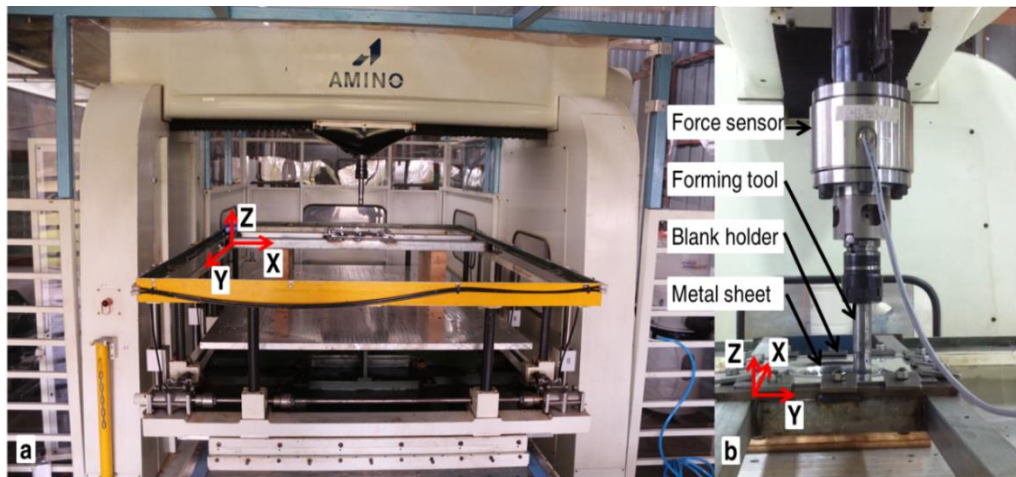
The AMINO incremental forming machine and the implemented force sensor: (a) front view; (b) side view
